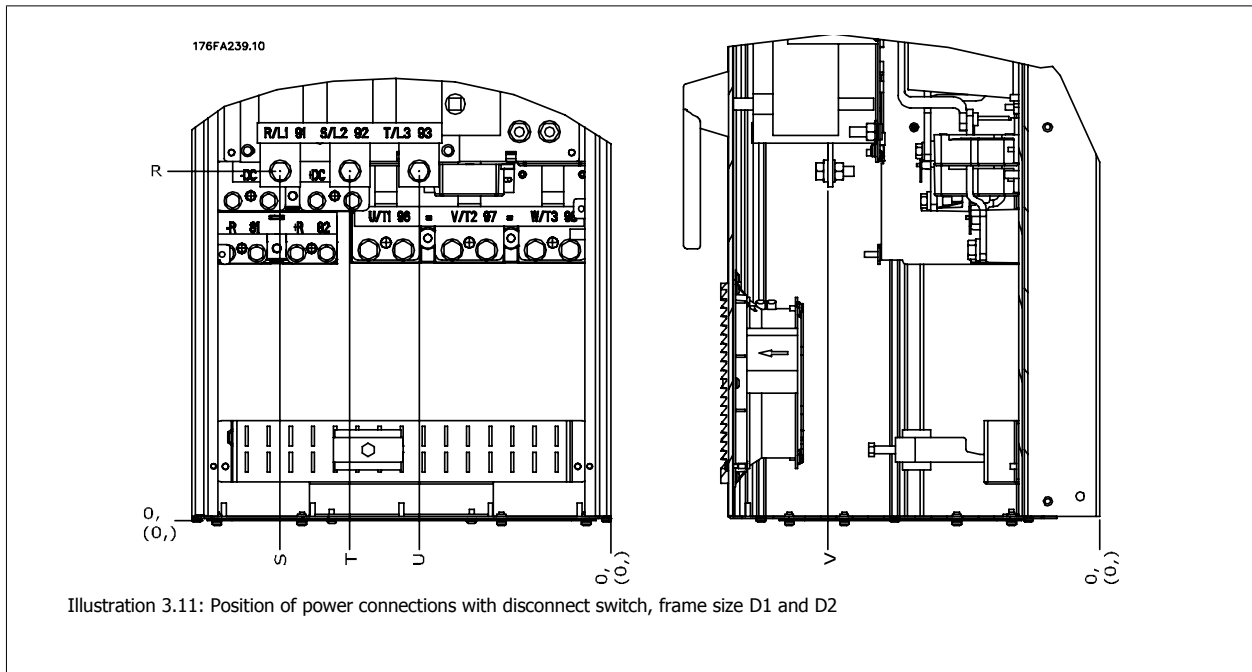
Position of power connections with disconnect switch, frame size D1 and D2
